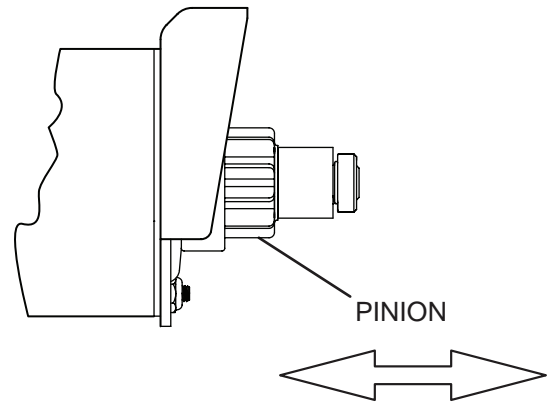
Check Pinion Gear Operation (Single Cylinder)
